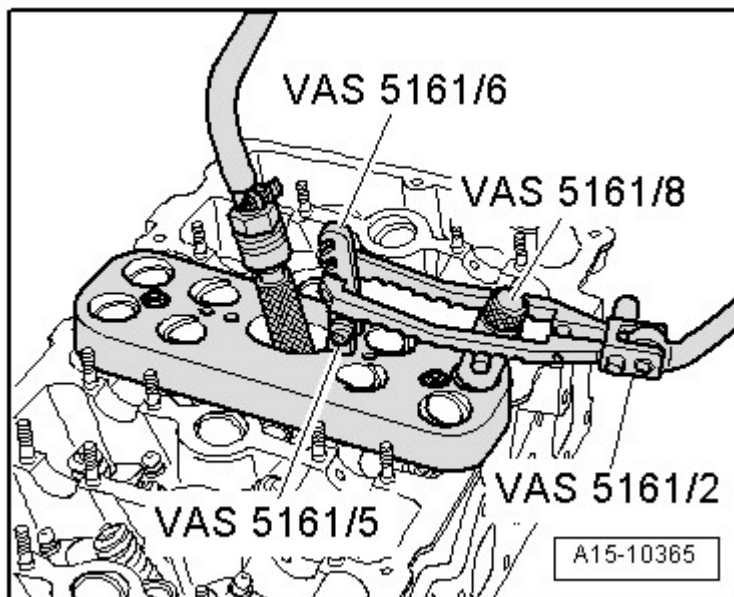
Identifying VAS 5161/8, VAS 5161/2, And VAS5161/6 With VAS 5161/5 Installed In Guide Plate
